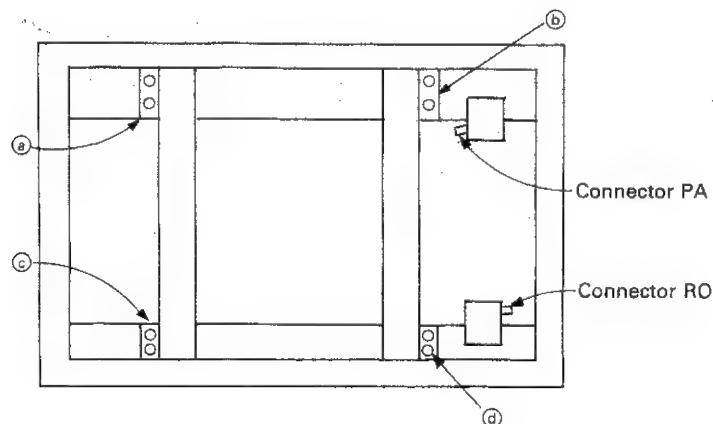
Rotational Mechanism Unit with Rear Cover Removed
